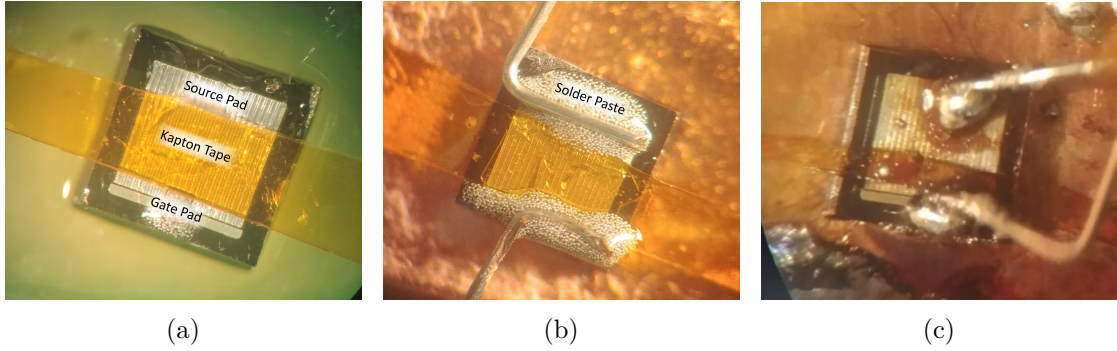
Adding electrical contacts to bare die. (a) Kapton tape applied as psuedo mask, (b) solder paste applied to contacts along with wires, (c) resulting beads of solder do not wet the pads.
